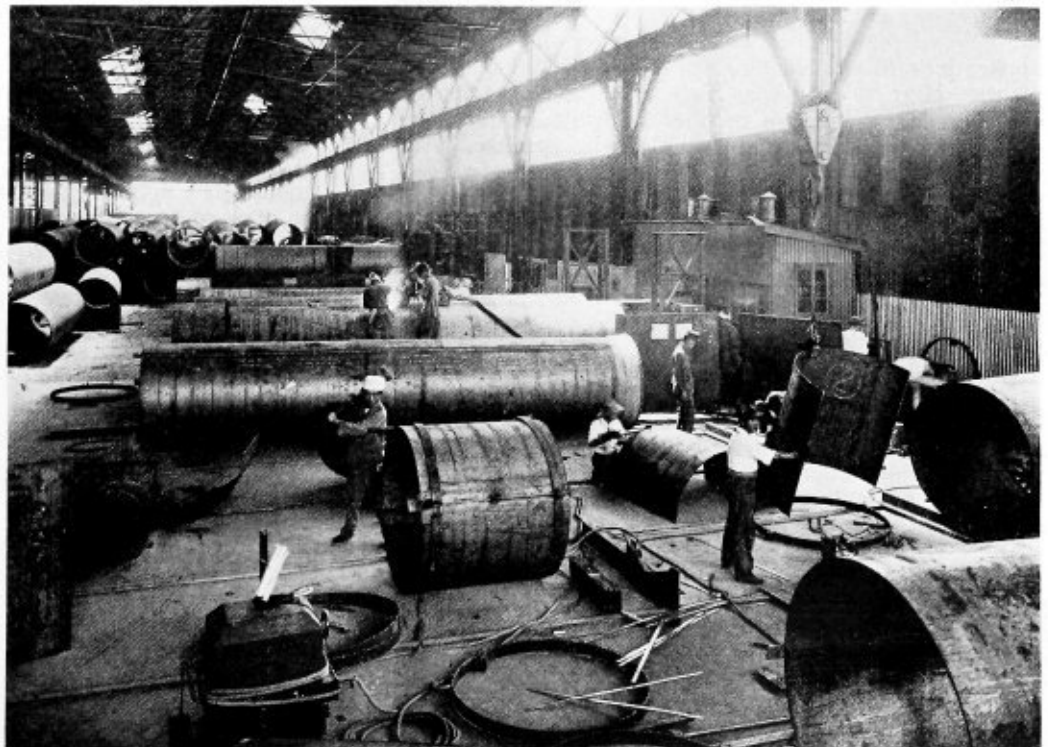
Welding inside seam of 66-inch pipe
